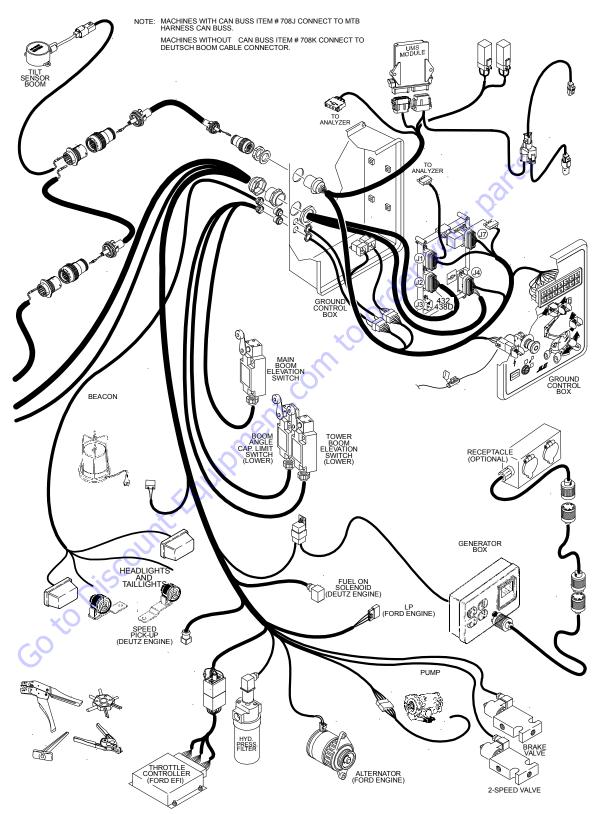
Electrical Components Installation w/ADE (S/N 0300064432 to S/N 0300069000) - Sheet 2 of 2
